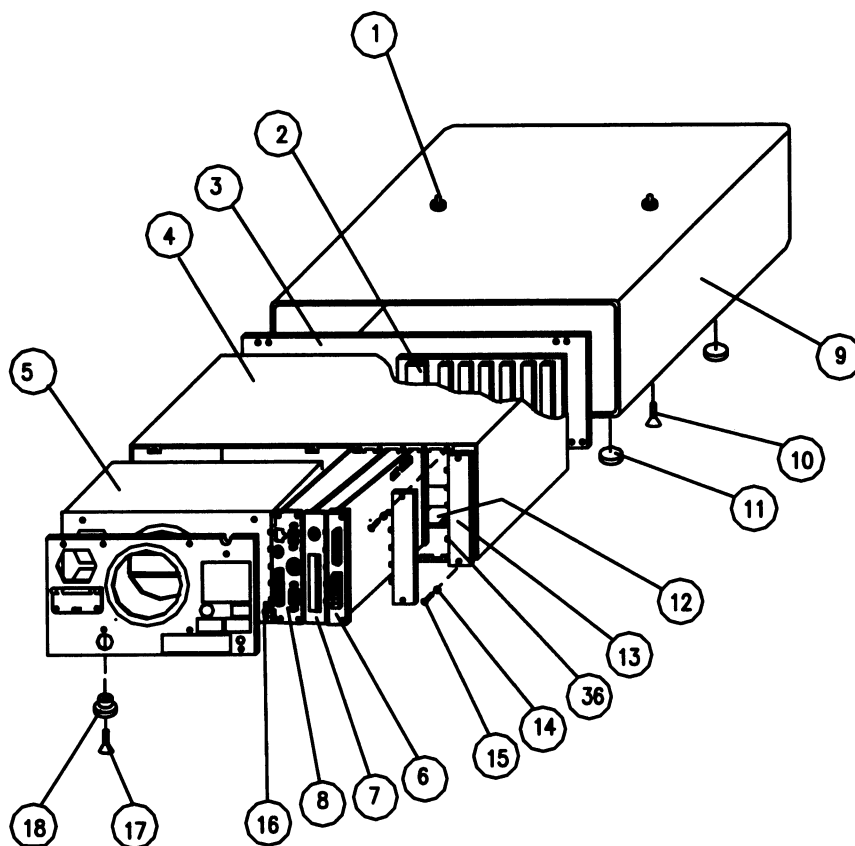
Exploded view of the Central Unit F-CU8 (rev.10)
